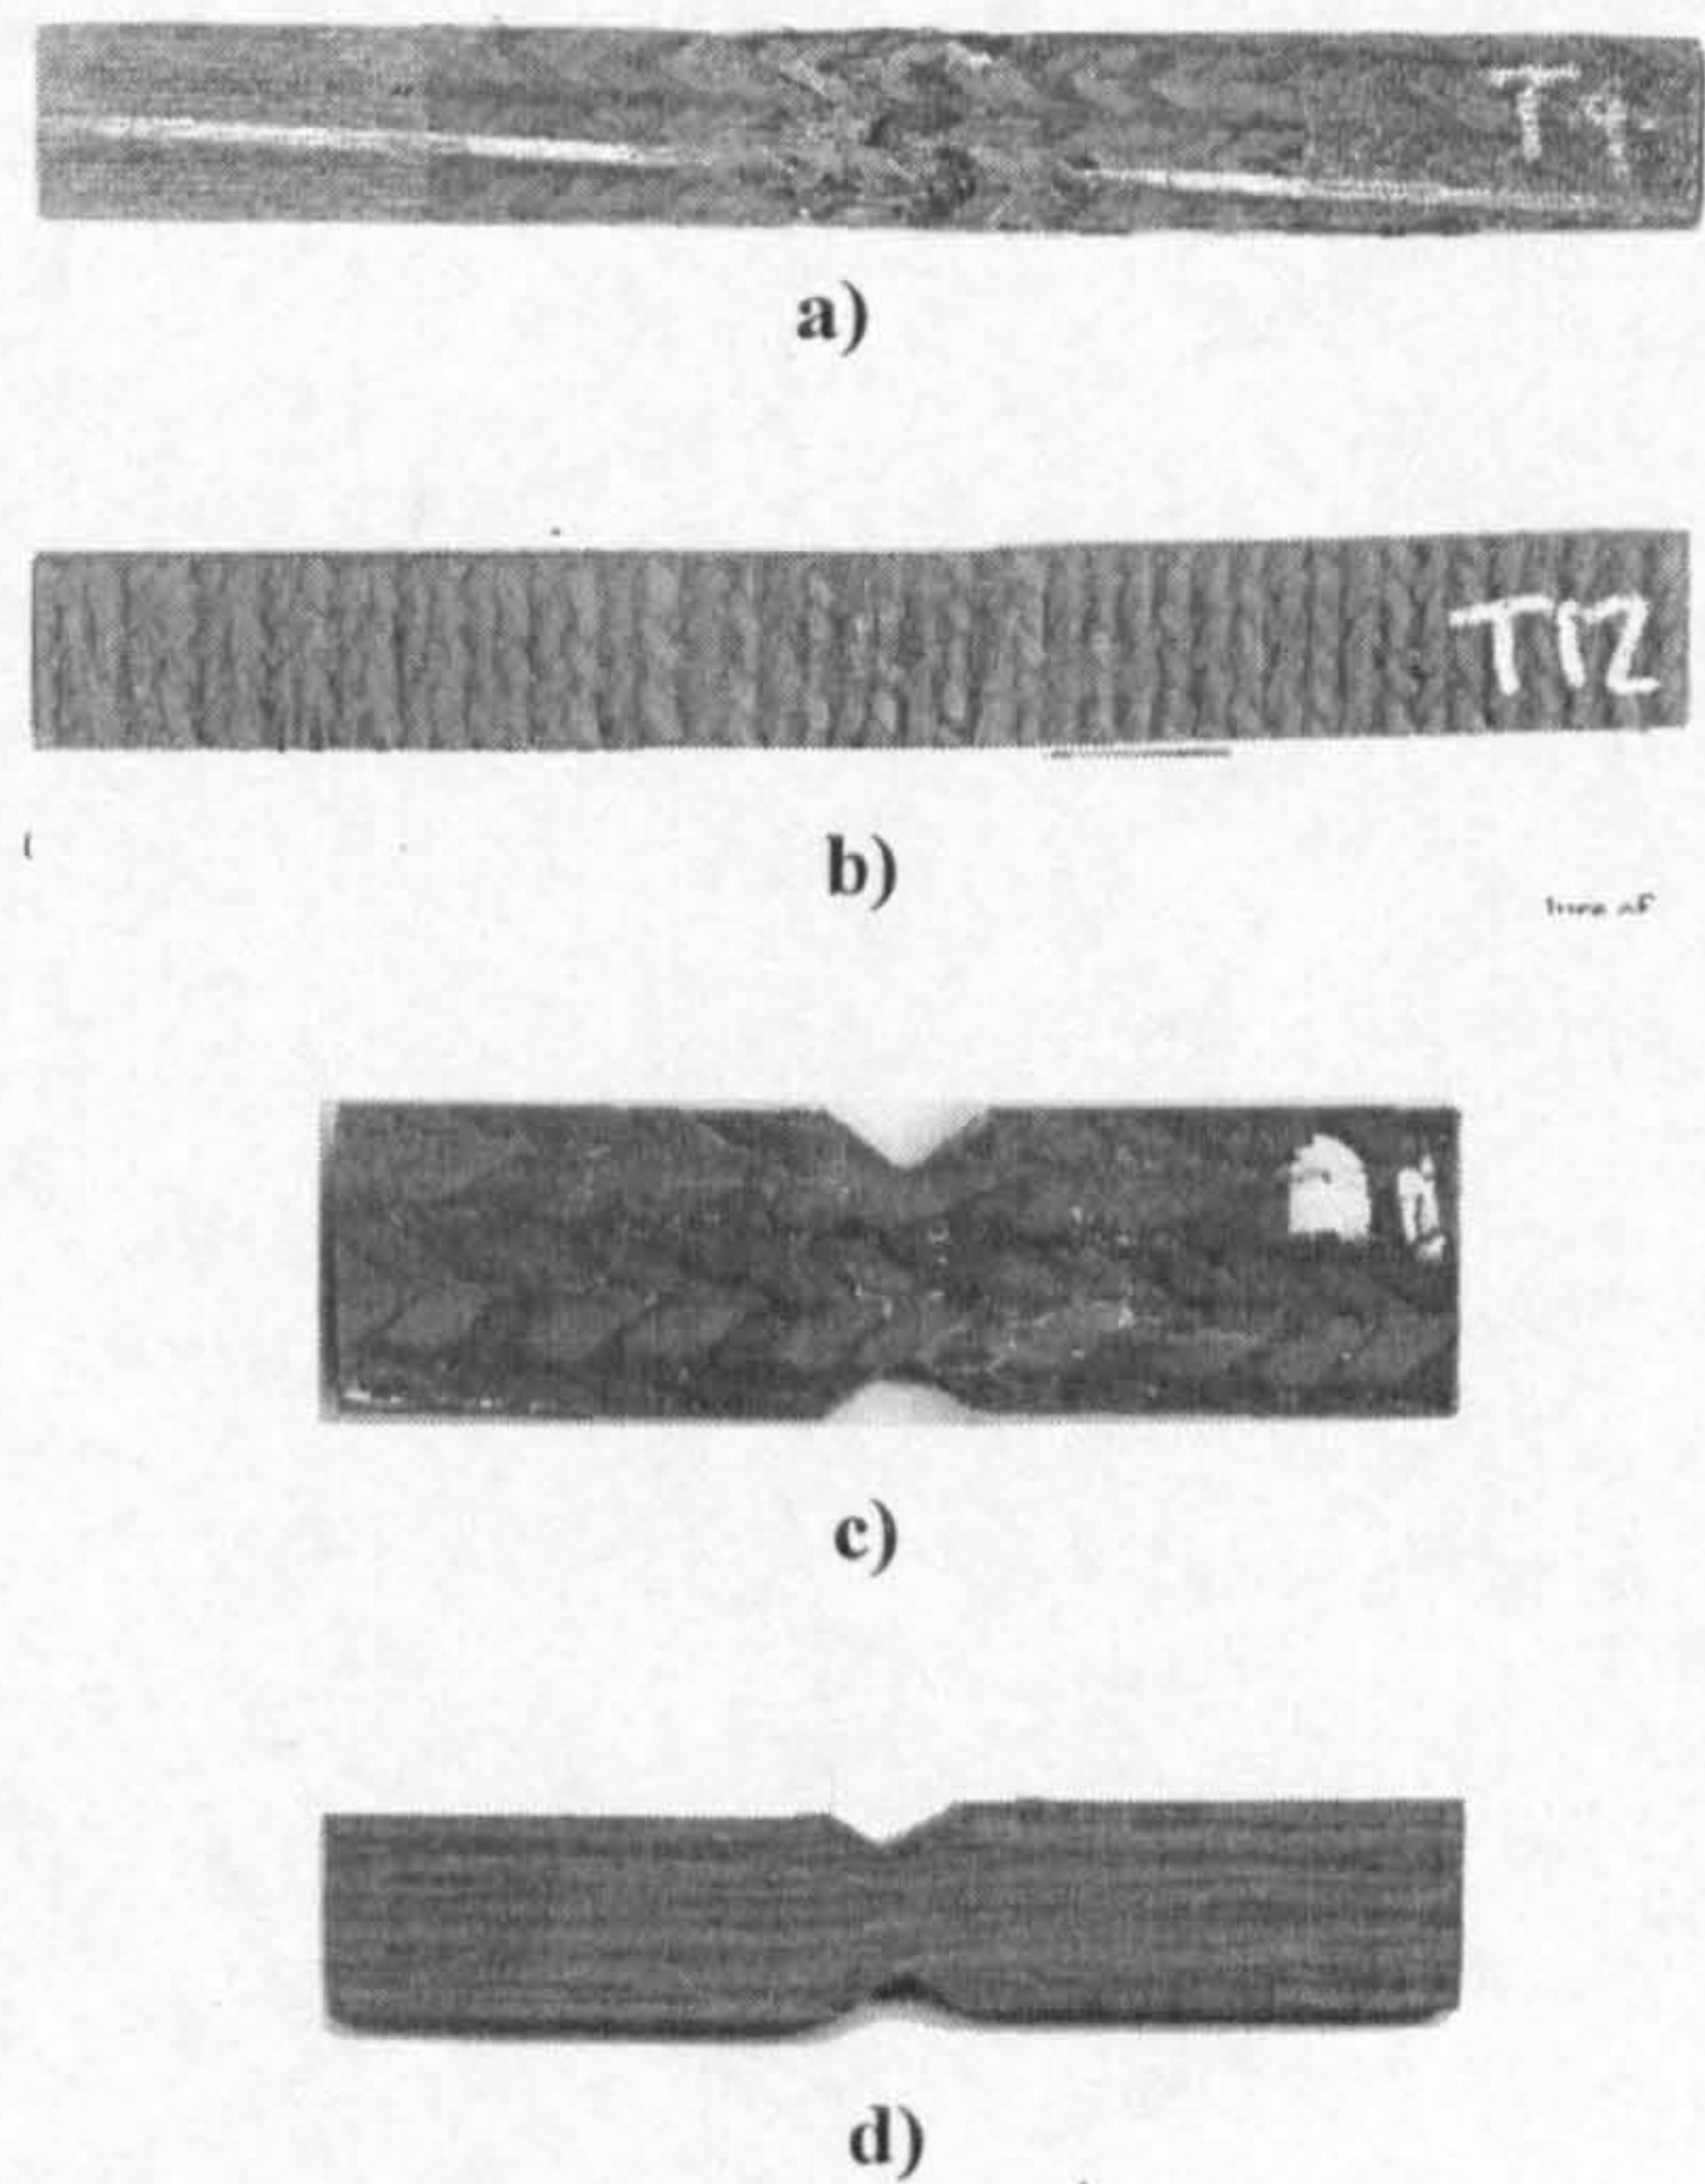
Braided Carbon Coupon Specimens    a) Axial    b) Transverse    c) In-plane Shear
